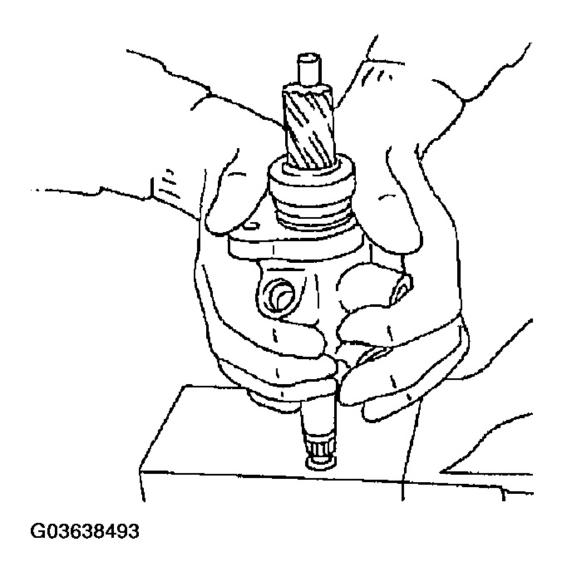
Pushing Out Pinion Shaft Component From Valve Housing Courtesy of MAZDA MOTORS CORP.
